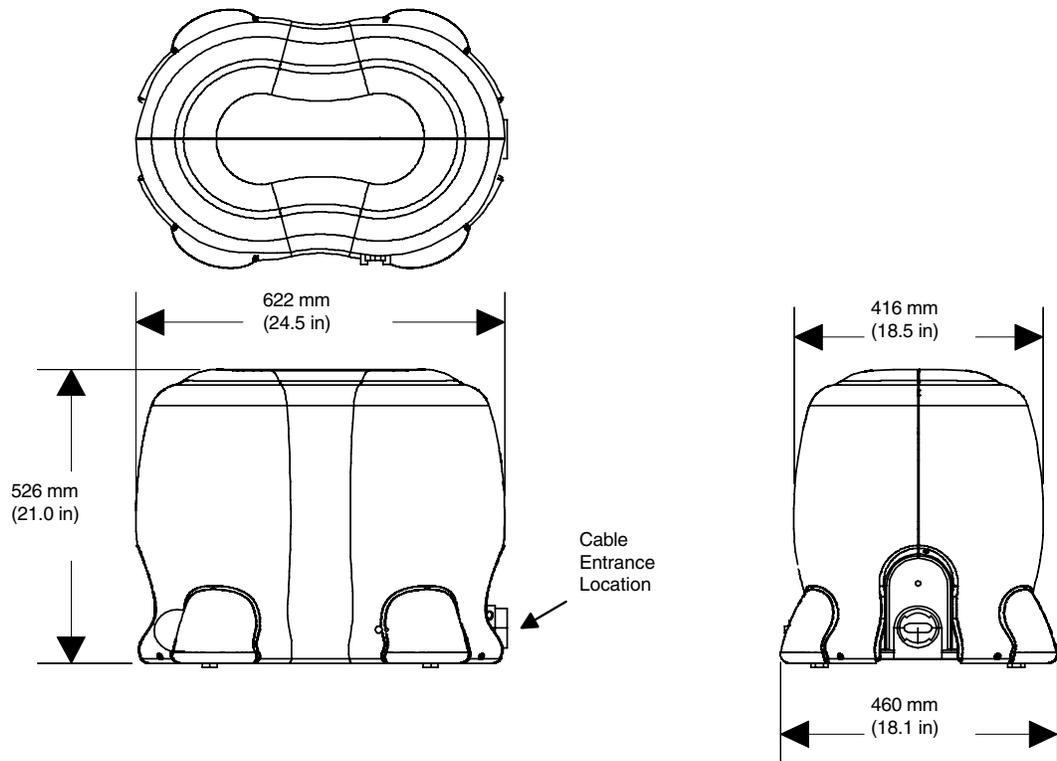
Detector Support Assembly (DSA) Dimensions
